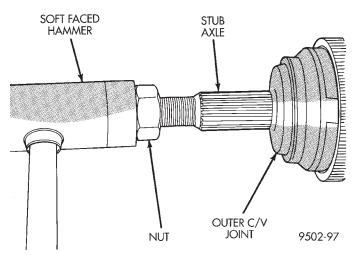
Outer C/V Joint Installation on Interconnecting Shaft
